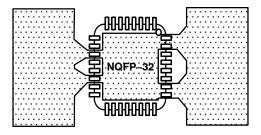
Example of NQFP-32 PCB Ground Plane Layout (preferred layout at top and bottom)
